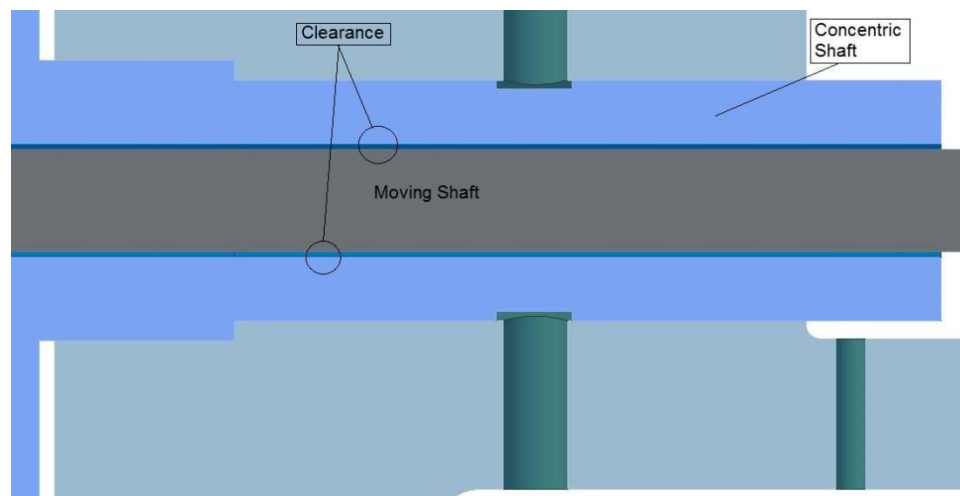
Clearance between the moving shaft & the rotary plate concentric rotating shaft
